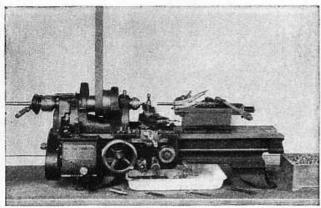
An 11-inch Lathe Equipped with Quick Acting Draw-in Chuck and Lever Feed Turret
